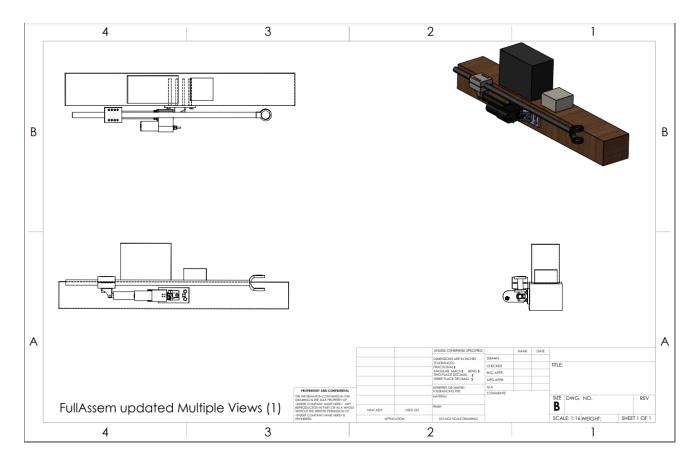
3-VIEW DRAWING OF FINAL ASSEMBLY.
